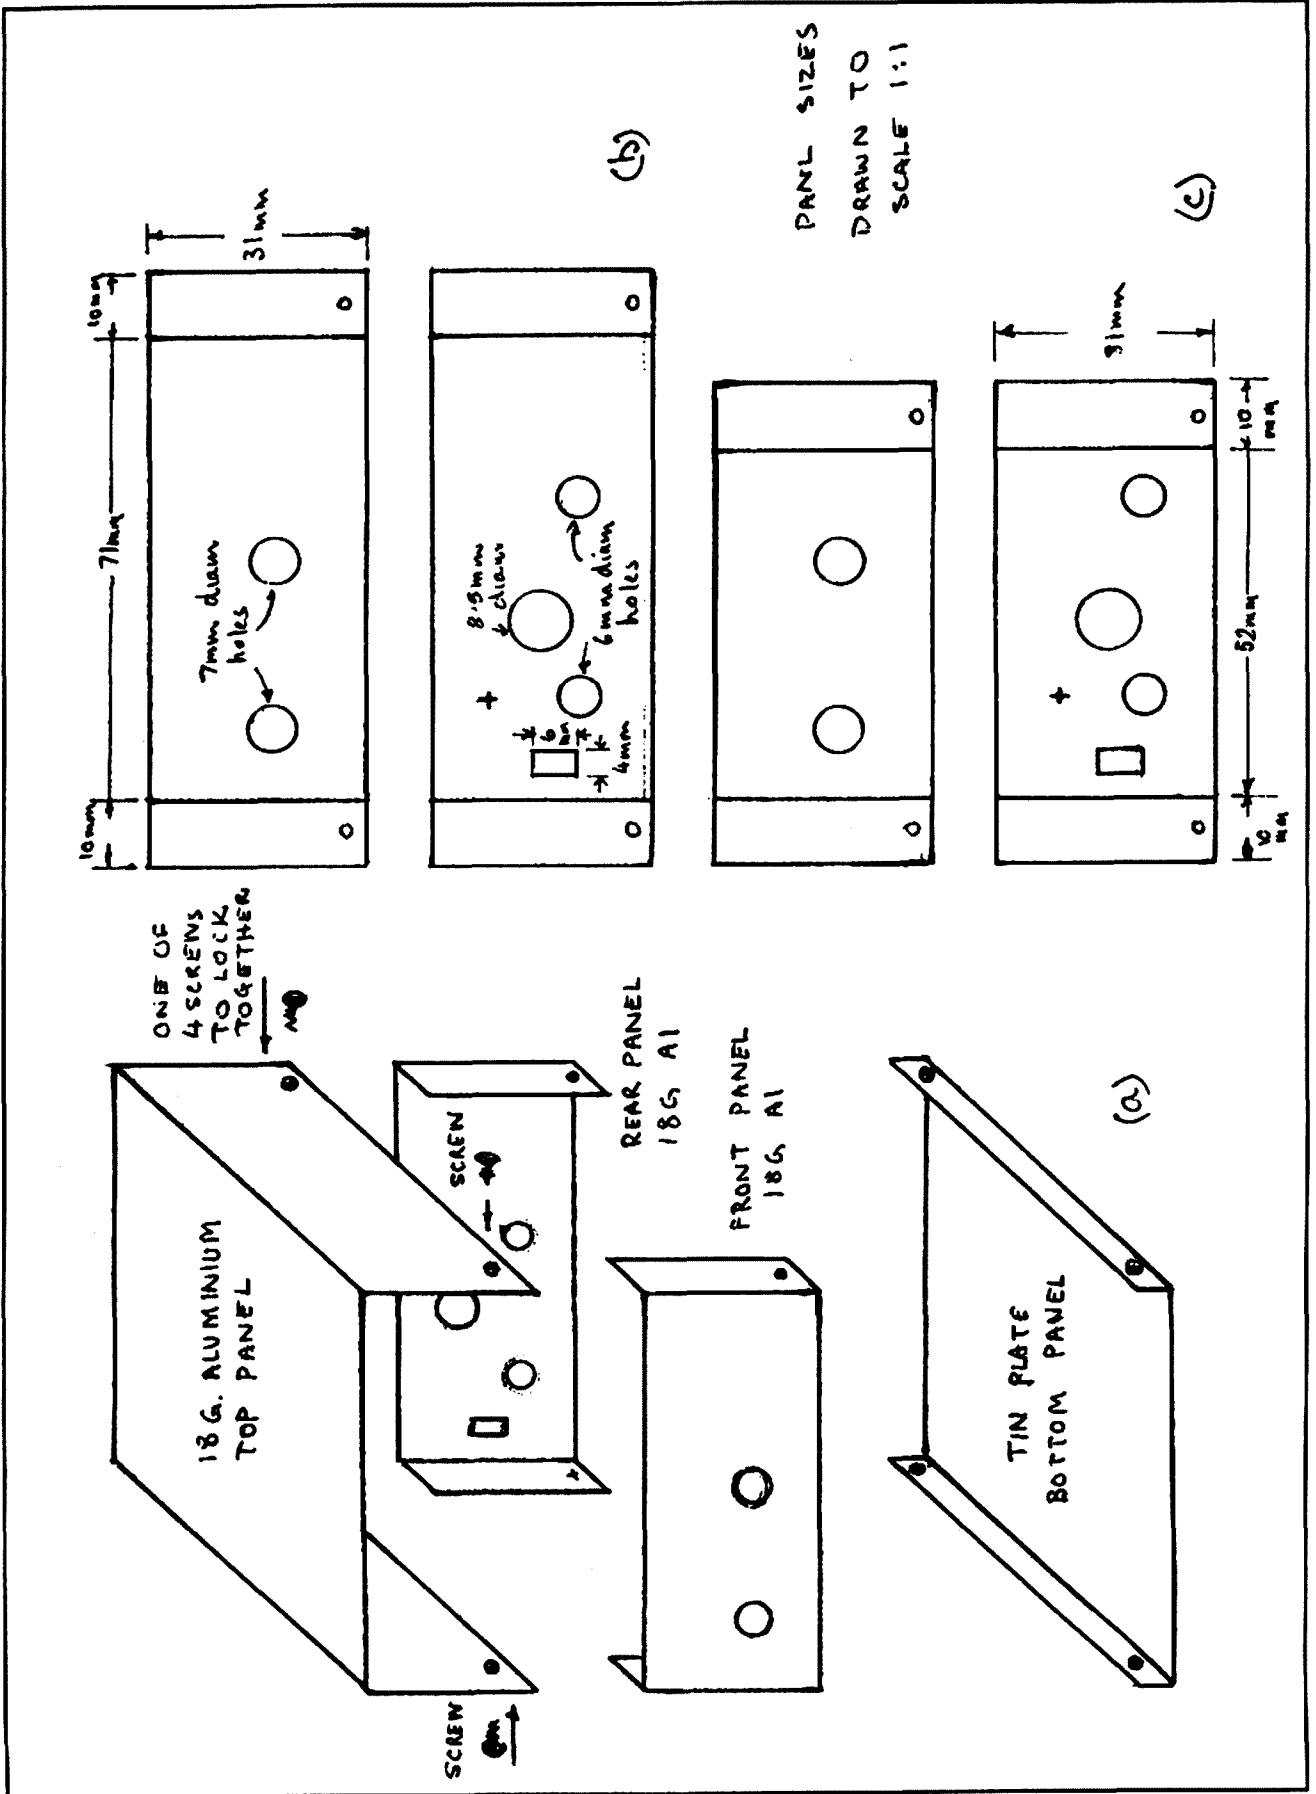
Simple case designs. Exploded view (a) and full size front and rear panels for two versions. Style (b) has sufficient space for an in house battery, while (c) relies on an external power source.
